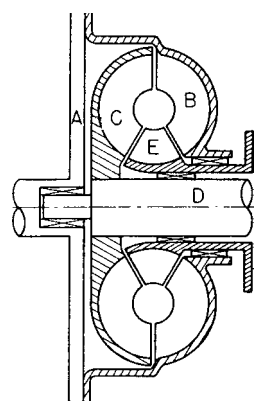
Hydraulic torque converter. (A) Flywheel; (B) impeller; (C) runner; (D) output shaft; (E) reactor.
